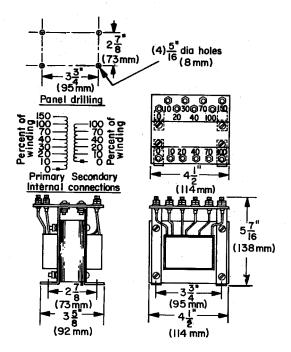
Dimensions of auxiliary autotransformer Cat. No. 3661843
